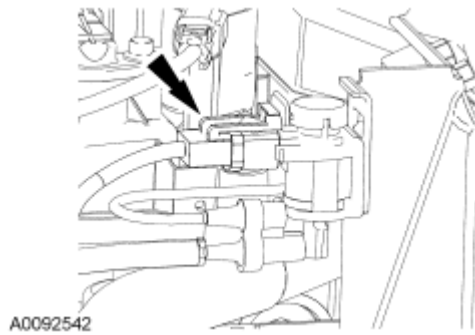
Locating Air Vacuum Regulator Electrical Connector
